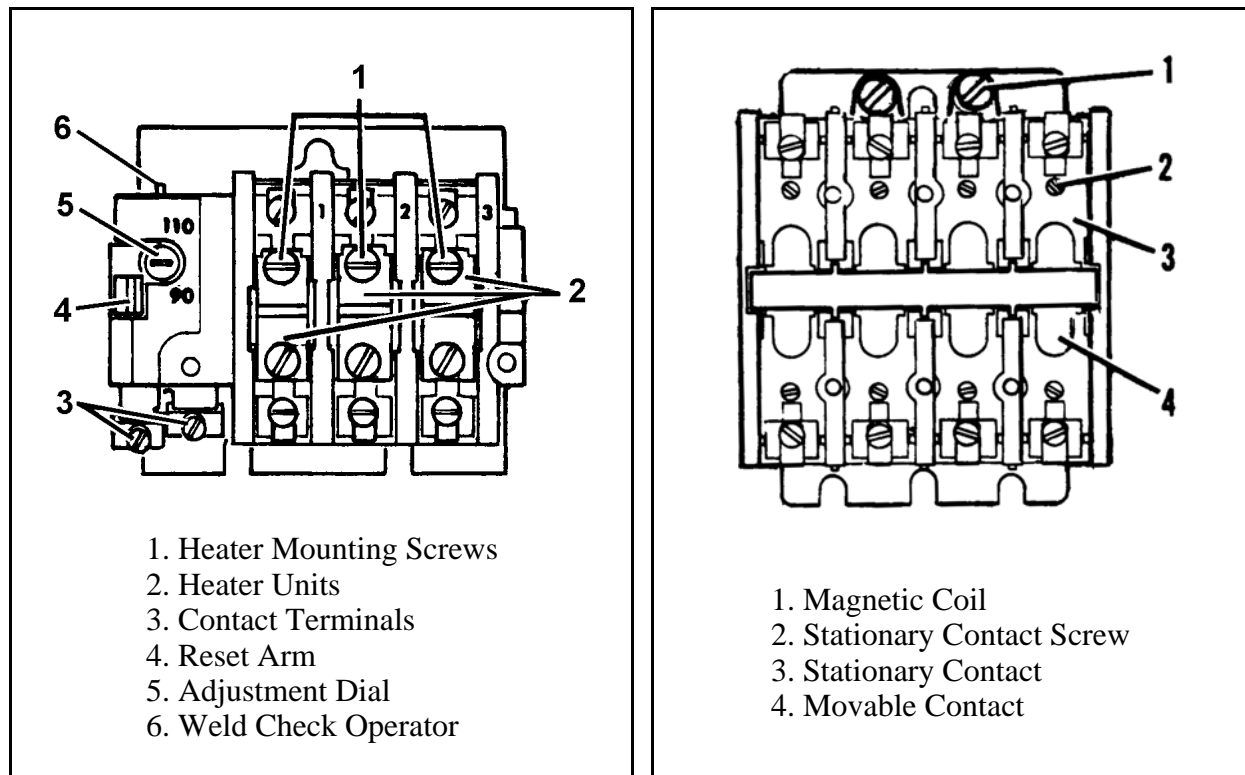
Overload Relay, left; Magnetic Contactor, right
